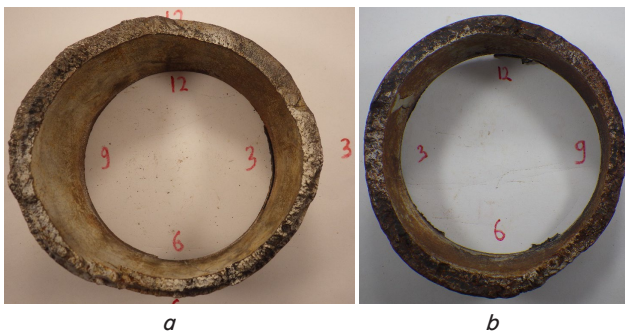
The surface macrophotograph: *a* – drill pipe A; *b* – drill pipe B
